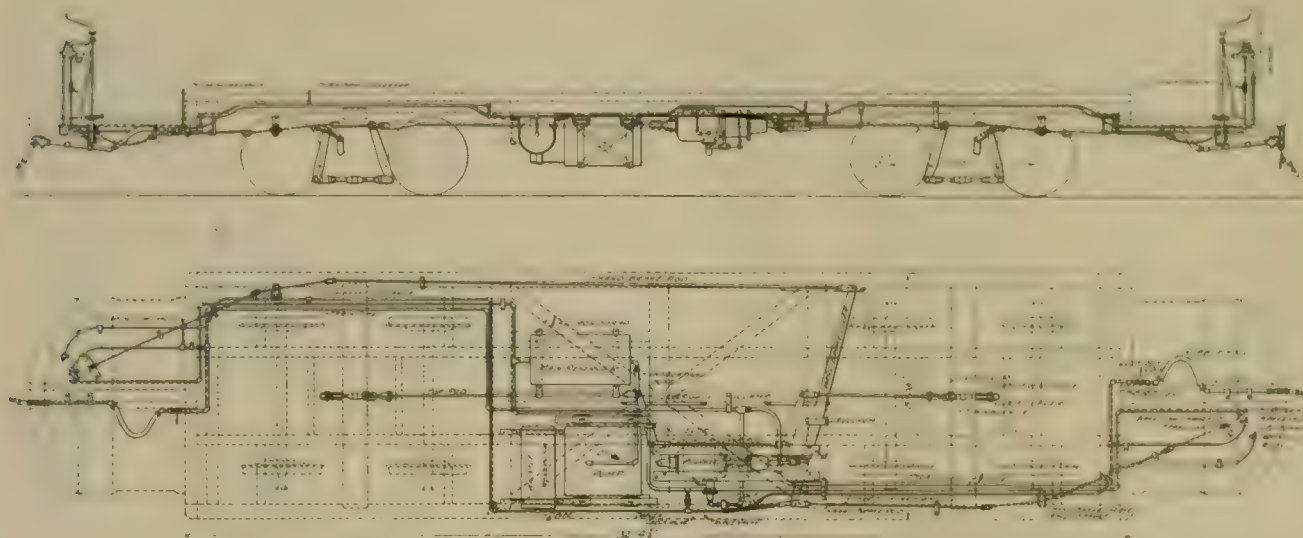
BRAKE RIGGING OF STANDARD 42-FT. 5-IN. BOX CAR.
